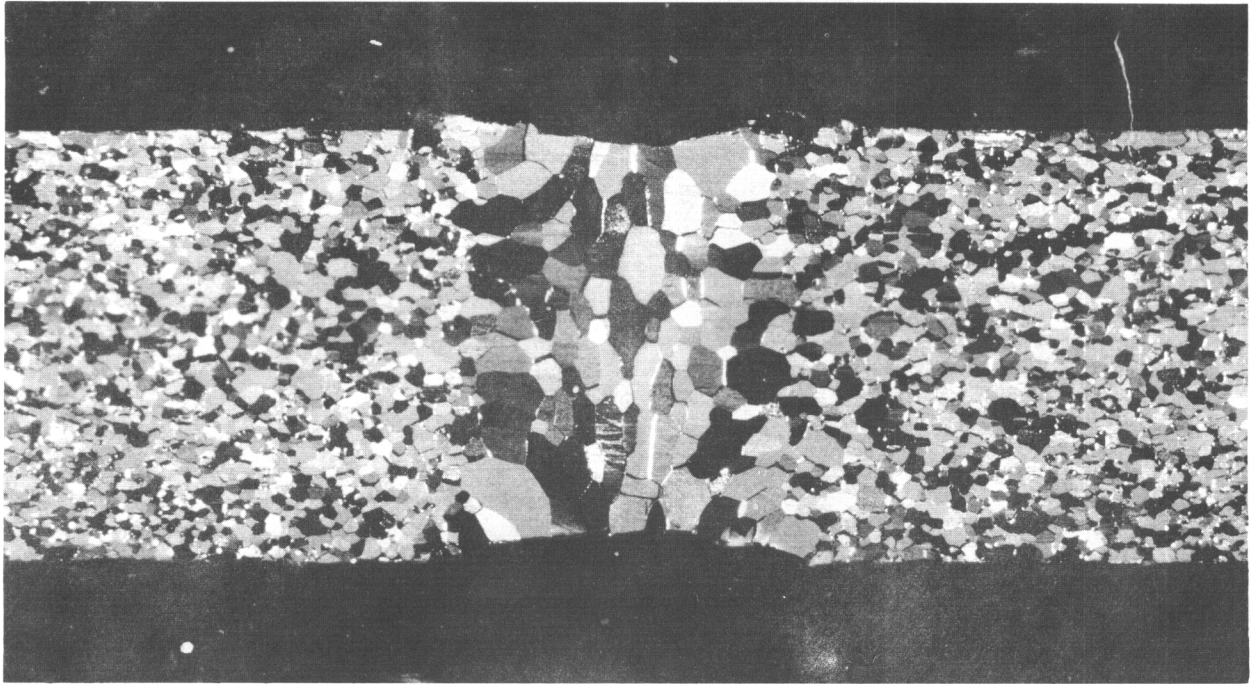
Trial Weld Cross-section; X20; 0.100-in. Tungsten; 150KV, 10ma, 7ipm, 0.040-in. Y oscillation
